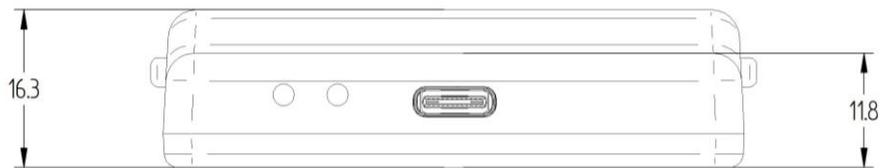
skID R1280I Technical Drawings – Bottom panel view
